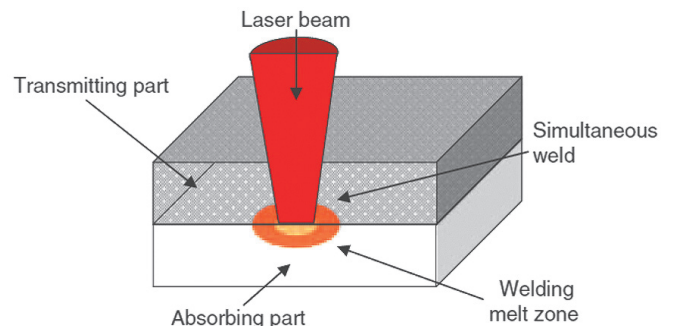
Laser transmission welding technique (Labeas *et al.*, 2010).
